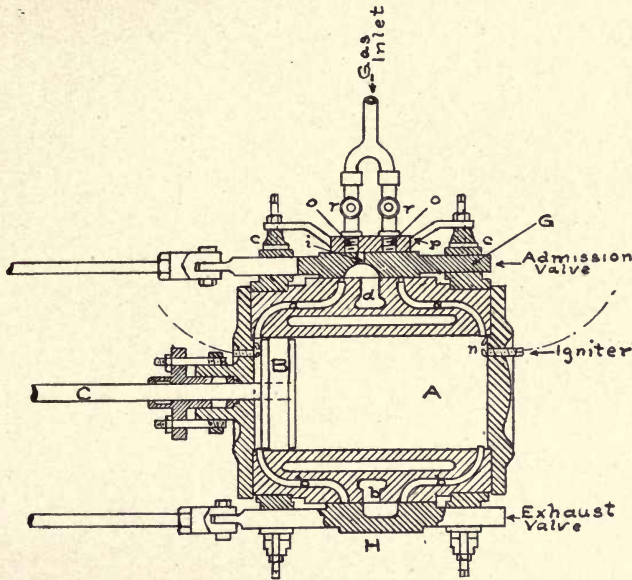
Longitudinal Section of Cylinder of Lenoir Engine.
